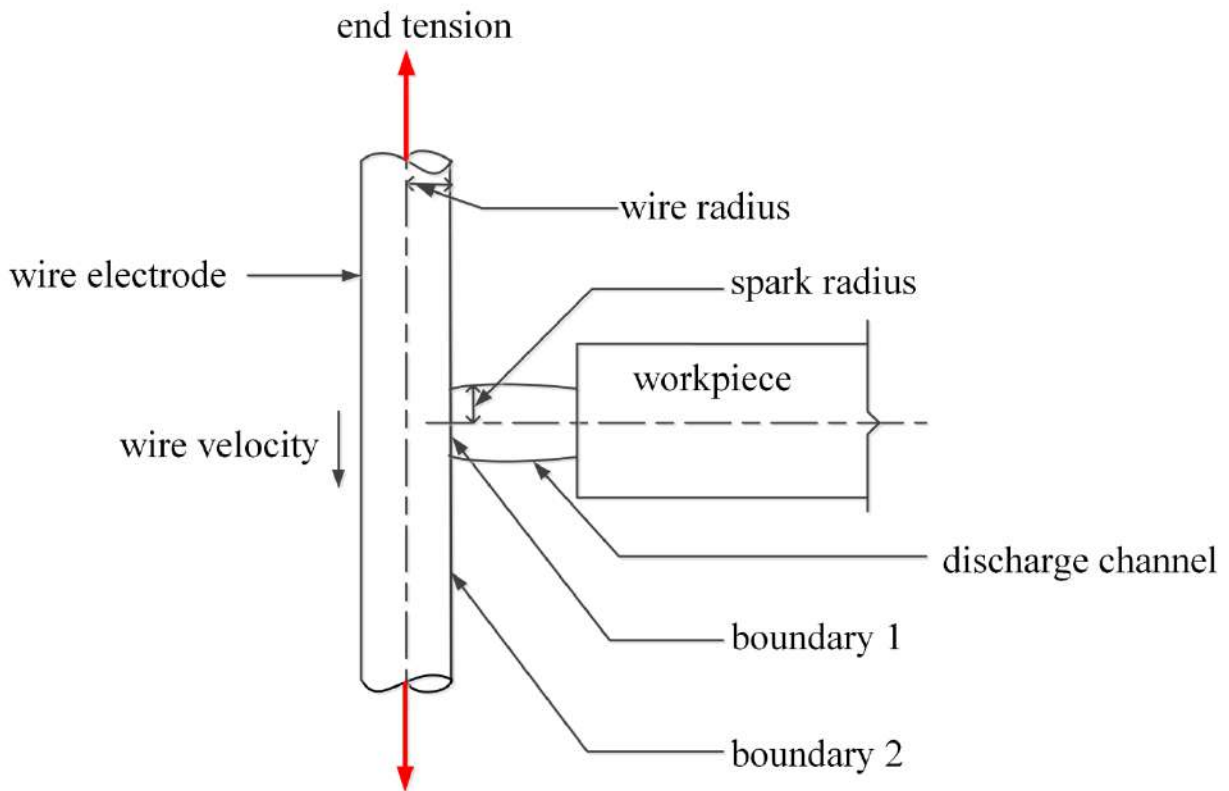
Schematic of wire electrode-spark-workpiece arrangement during WEDM machining
